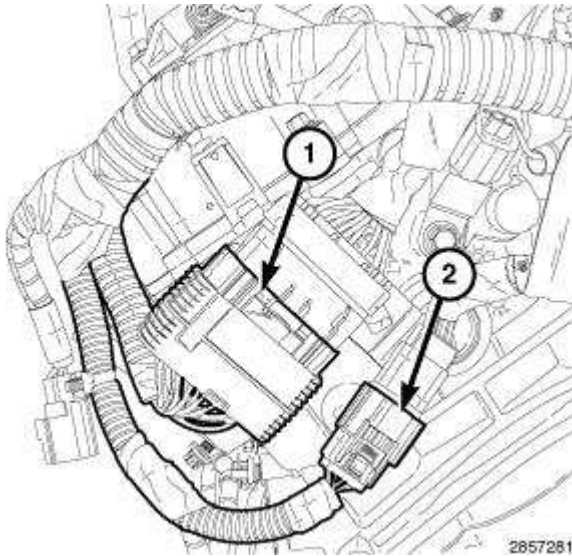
Engine Injection/Ignition Harness & Engine Oil Pressure/Temperature Harness
